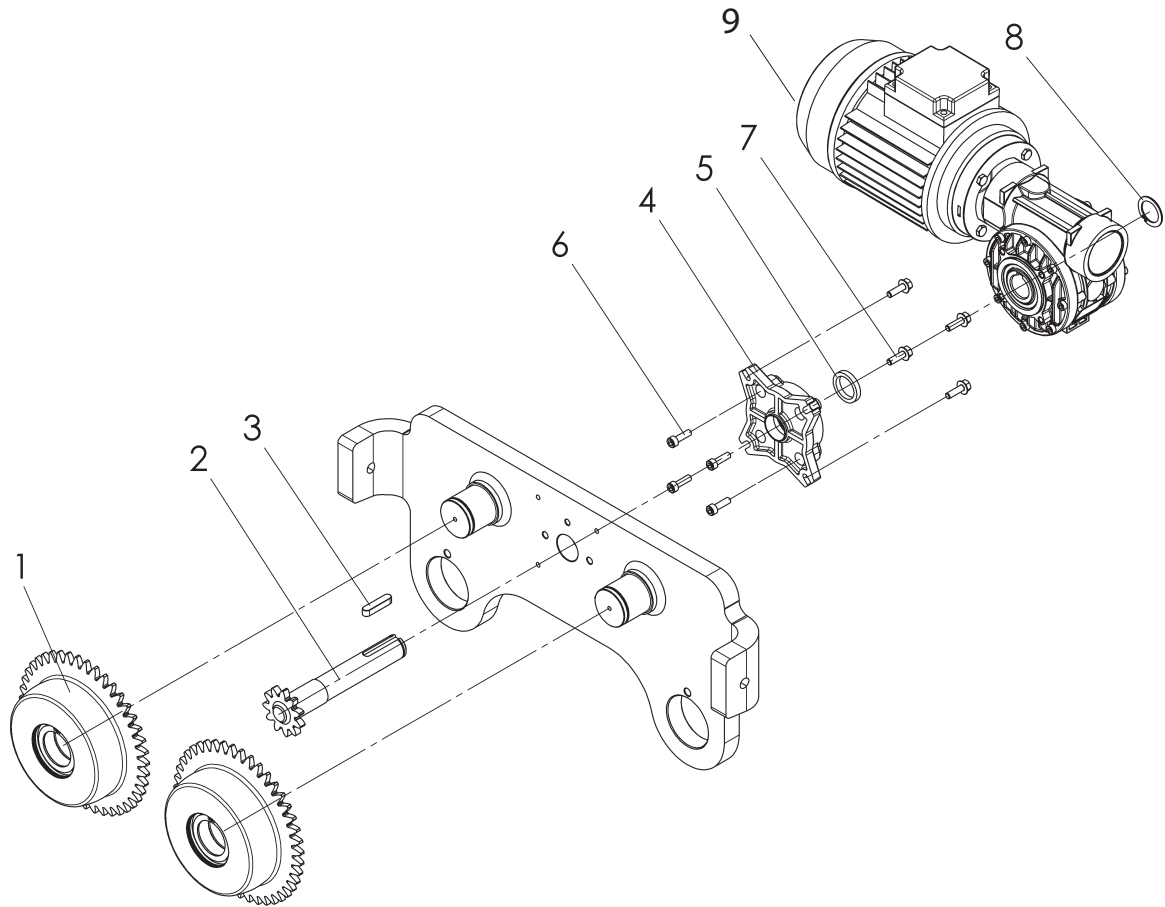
Electric drive for trolley CPE/F 1,600 – 5,000kg (other parts see push trolley)
